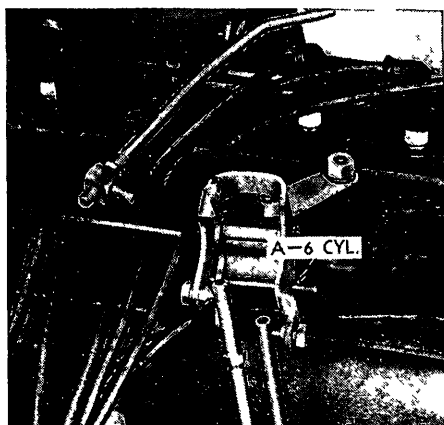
Adjusting pin installed at A on 6-cylinder 1948-49 Hydra-Matic
